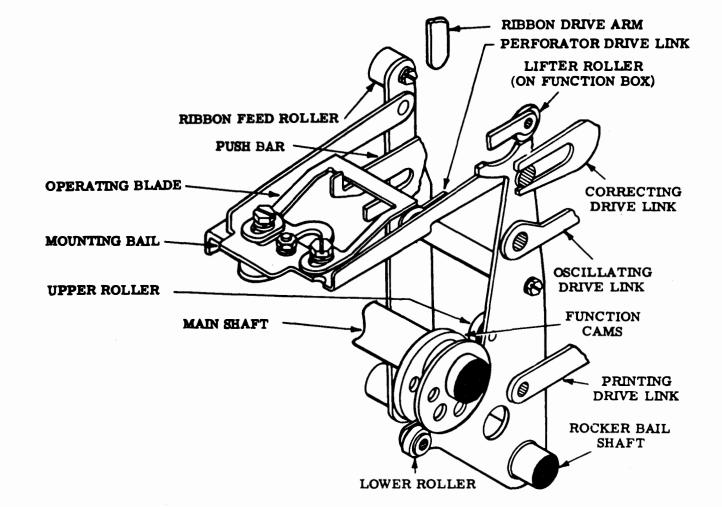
Function Cam-Clutch and Clutch Trip Assembly
